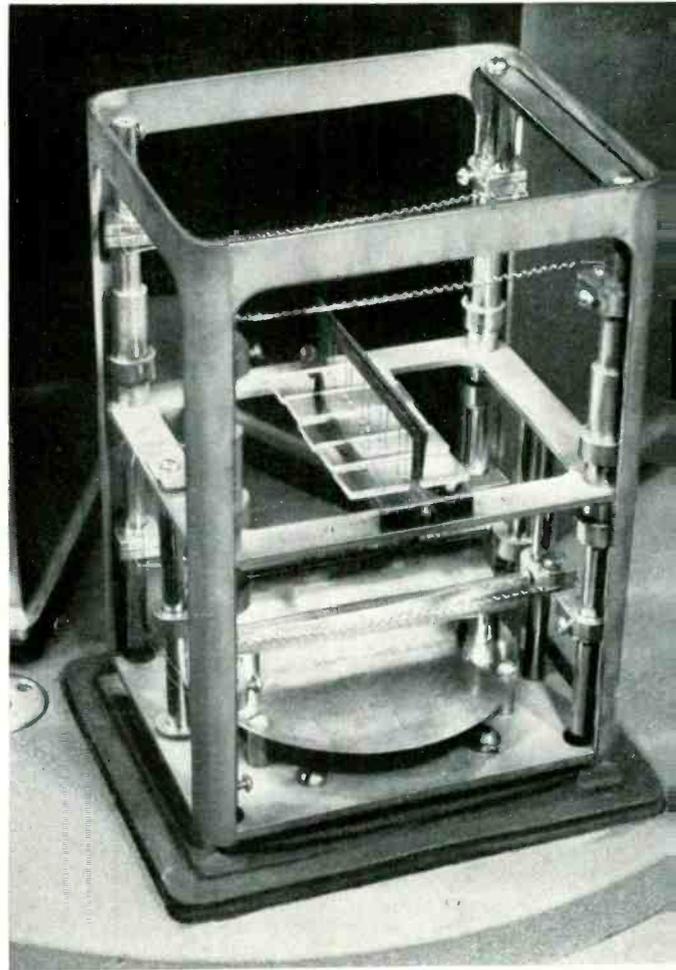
Inside view of vacuum chamber showing arrangement used to vapor plate gold electrodes on EDT crystal plates. The small diameter wire coils, two of which are visible at top of fixture, are tungsten heaters in which solid gold wire is threaded. After high vacuum is attained, these heaters are made incandescent and the gold evaporates to cover the crystal plates with a film approximately 15 millionths of an inch thick
